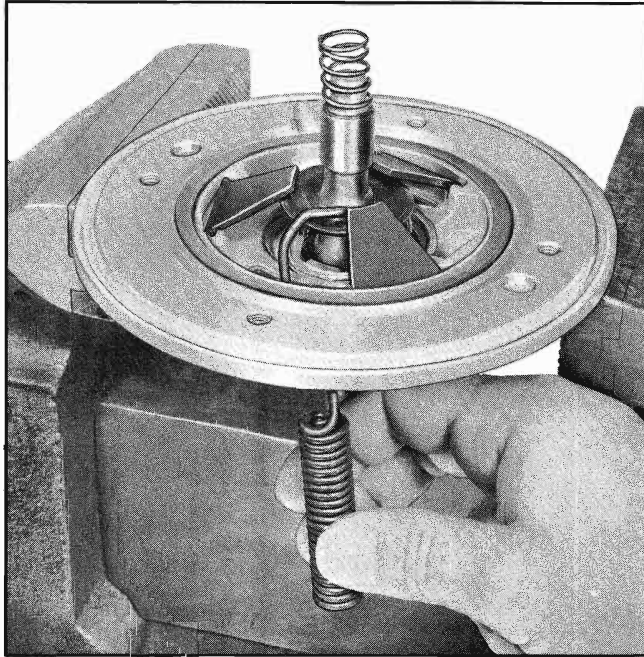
M-18 Spring Located on End of Air Valve Assembly
